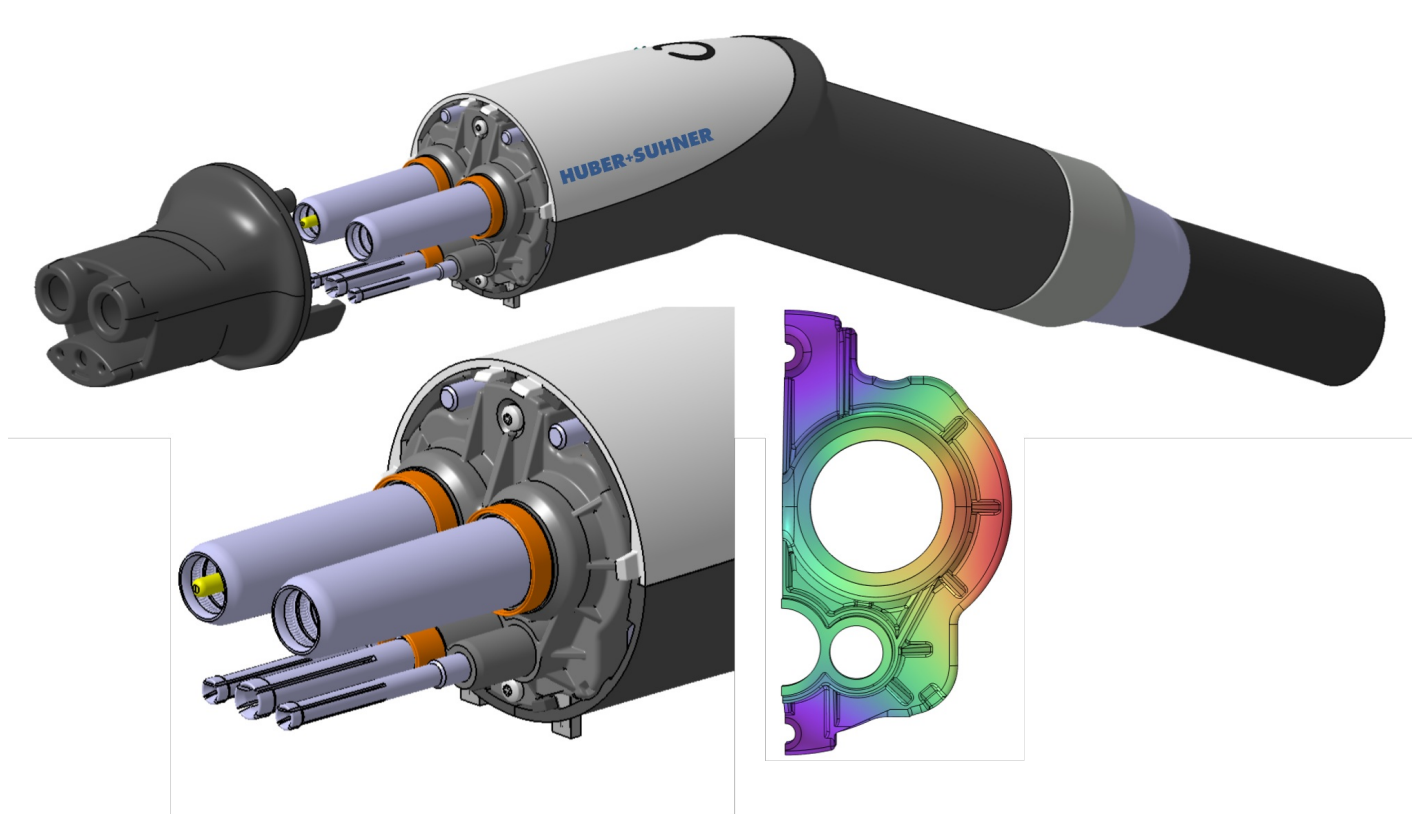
Huber+Suhrner NACS Charging Solution, top = assembly; bottom left = contact holder; bottom right = displacement magnitude
